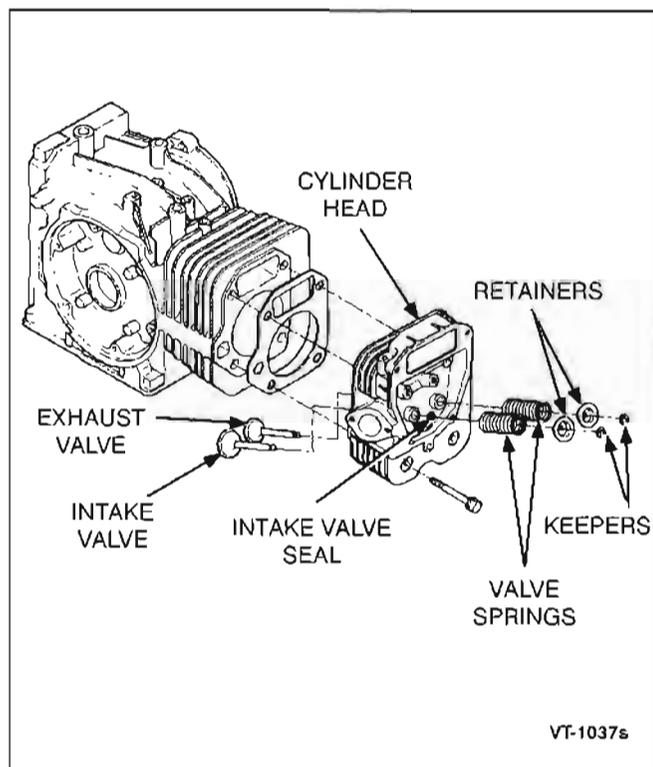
OVERHEAD VALVE SYSTEM
